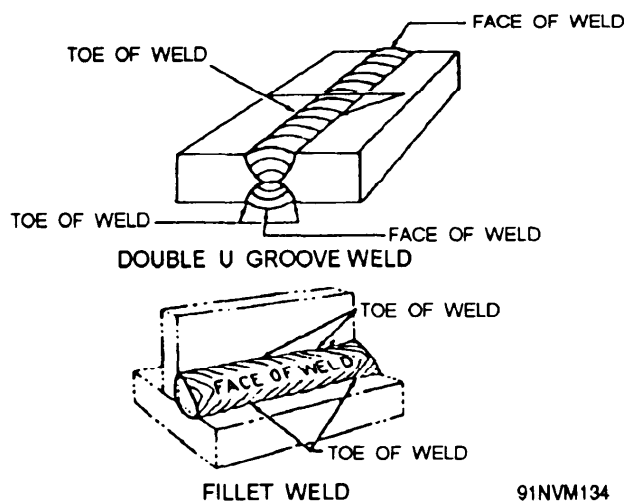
Face and toe of groove and fillet welds.
